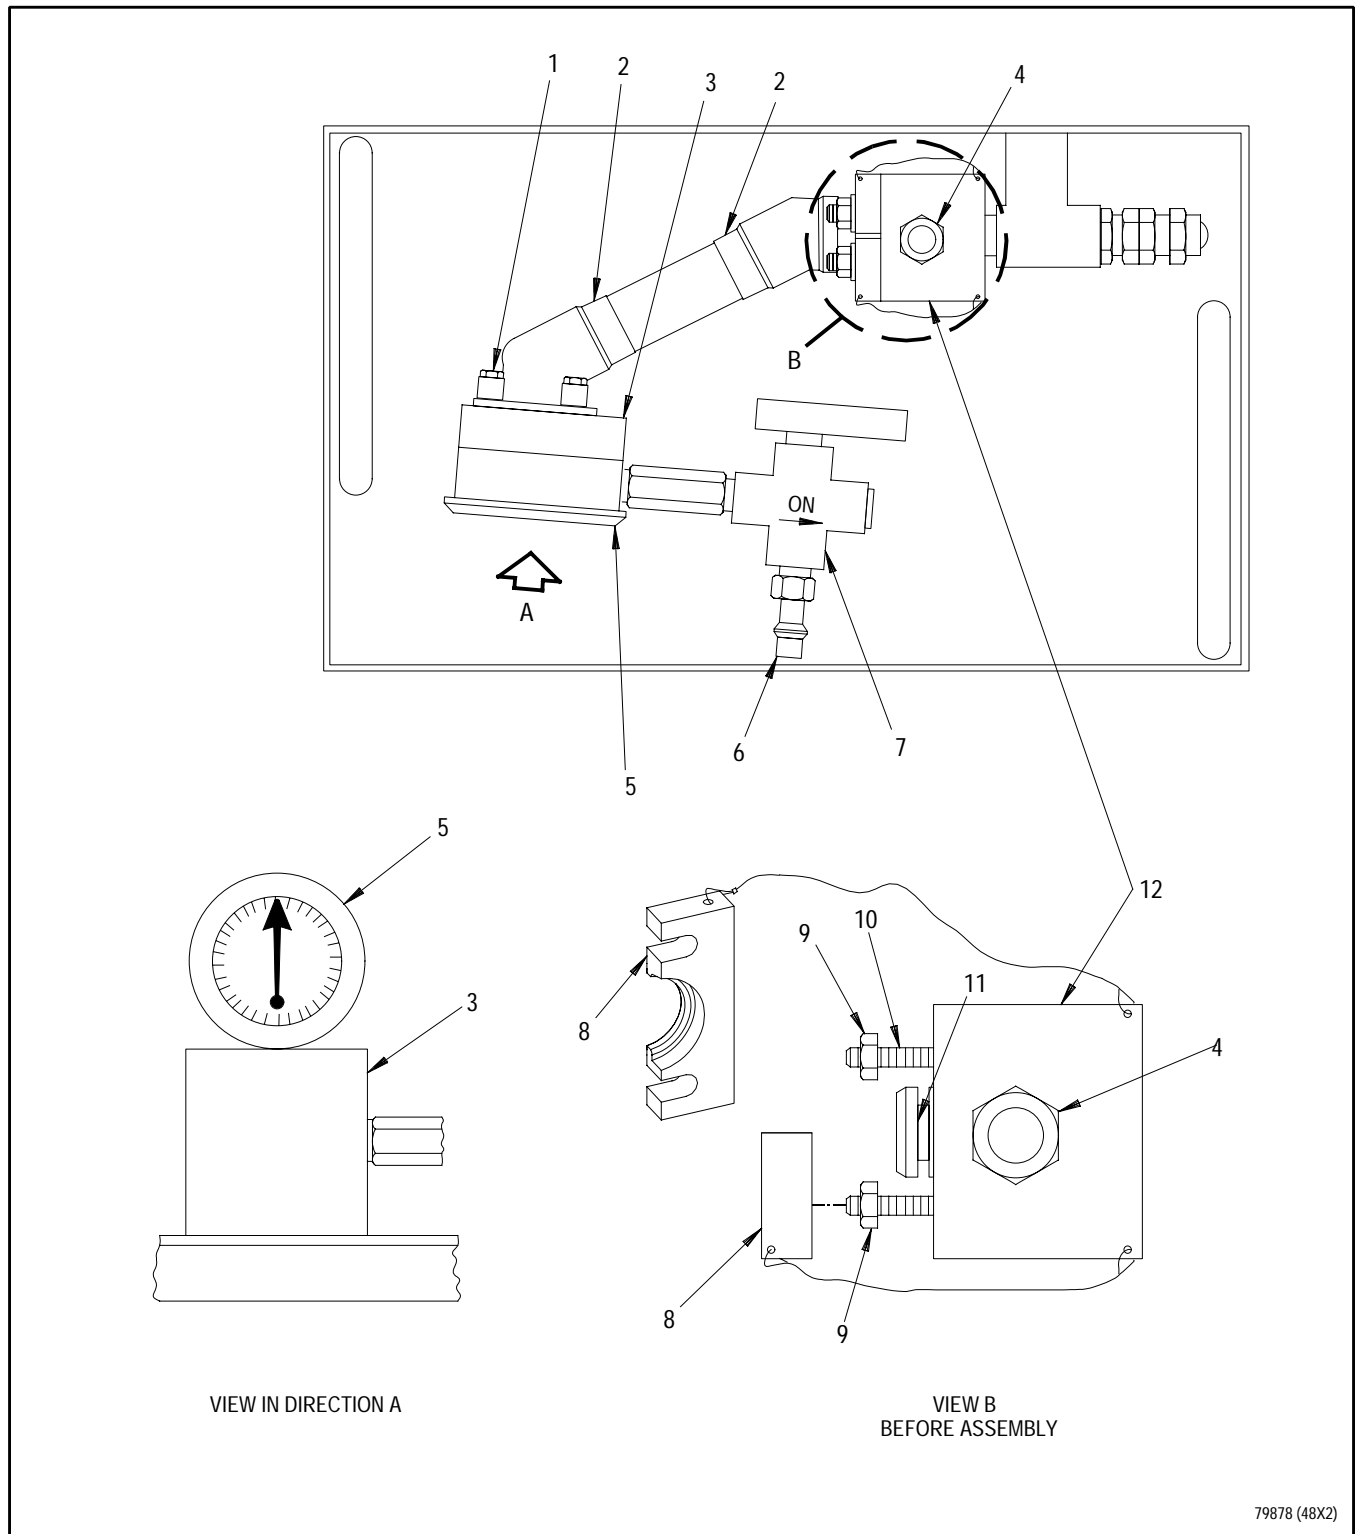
No. 4 Bearing Air Supply Tube Assembly - PWA 71483 Leak Test Fixture Installation
